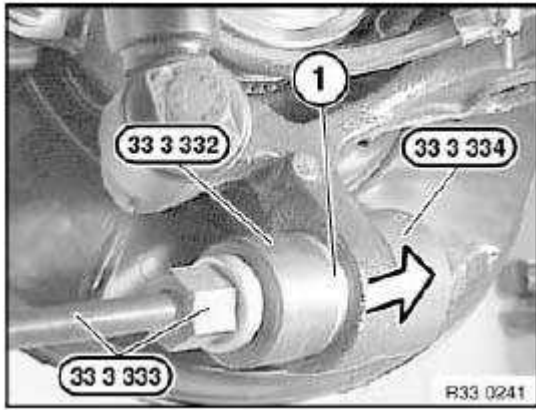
Special Tool (33 3 332), (33 3 333) And (33 334)
